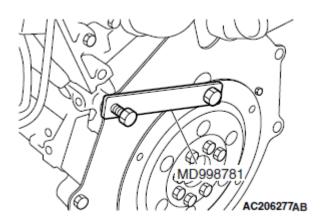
Securing Drive Plate Using Special Tool MD998781 Courtesy of MITSUBISHI MOTOR SALES OF AMERICA.
